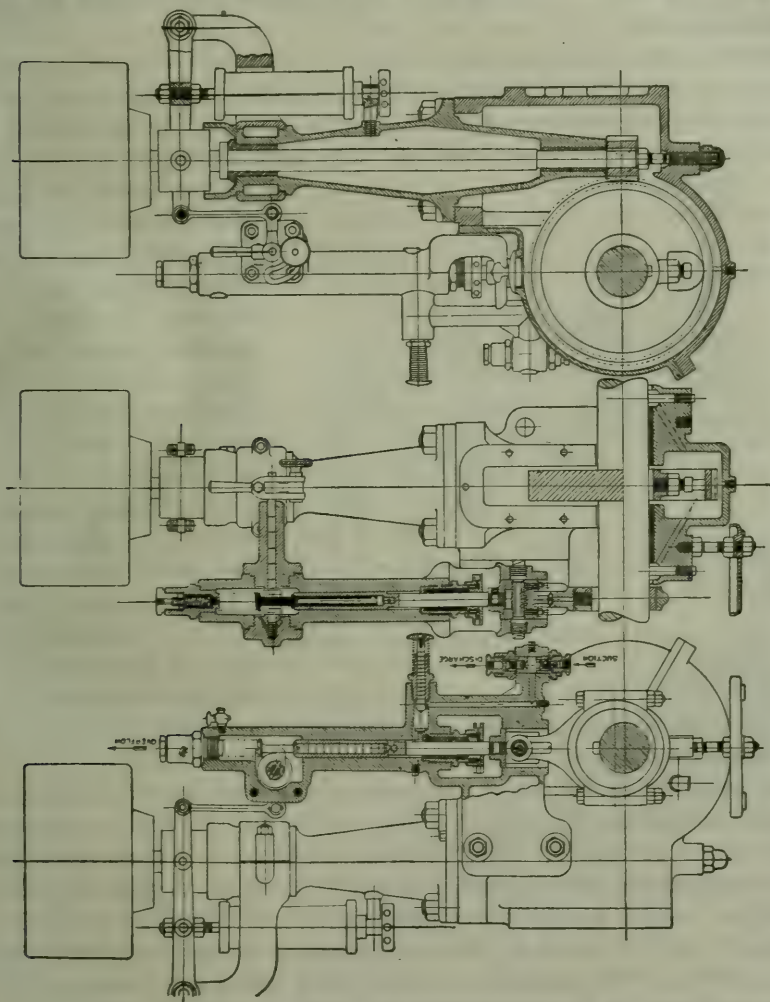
Cross section of oil pump designed to supply oil to open nozzle.
